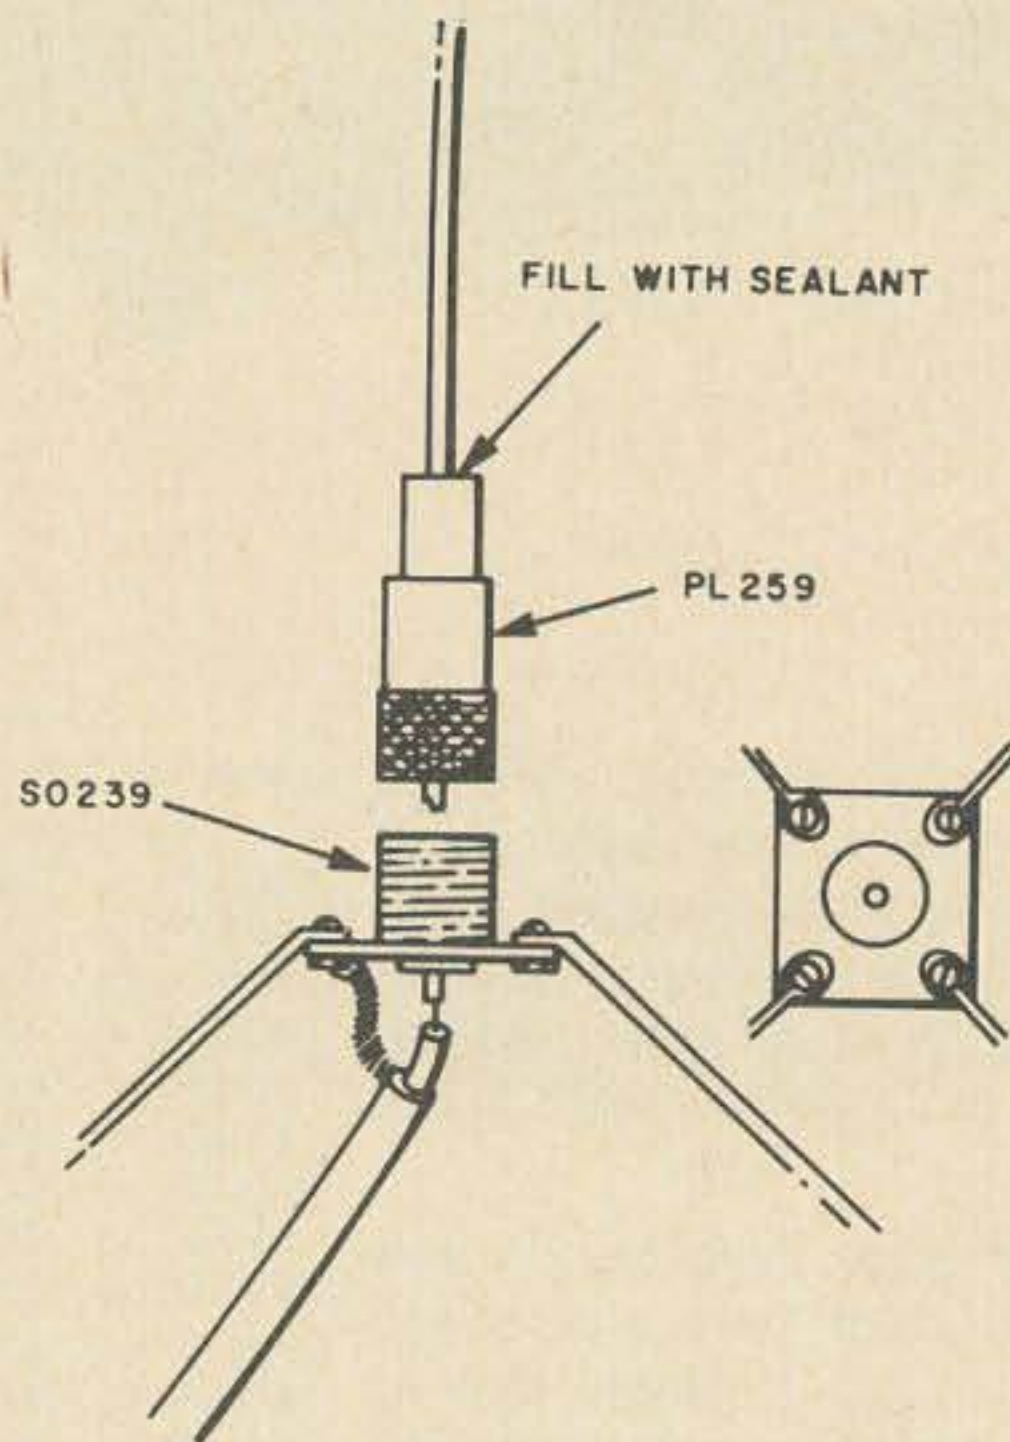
Construction details for the loaded coat hanger for 2 meters.
